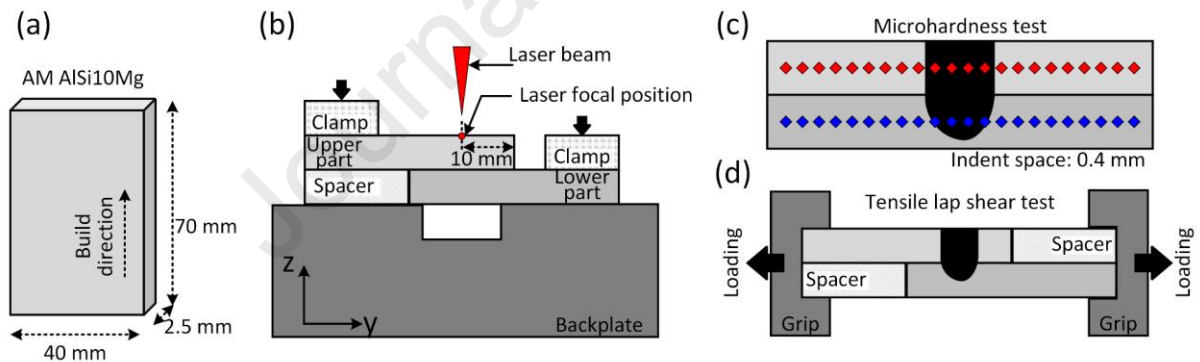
Schematic diagram illustrating (a) geometry of the AM AISi10Mg sheet (b) experimental set-up of the remote laser welding process, (c) positions of the microhardness test on the weld cross-section, and (d) set-up of the tensile lap shear test.
